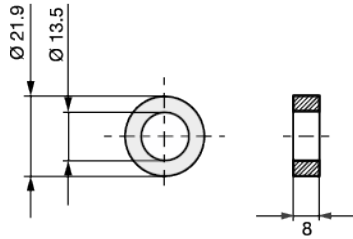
Installation dimensions of BTL-P-1014-2R position magnet
